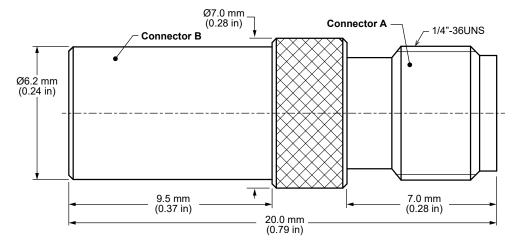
Product Dimensions for the ADP-SMAF-SMBM-G Adapter
